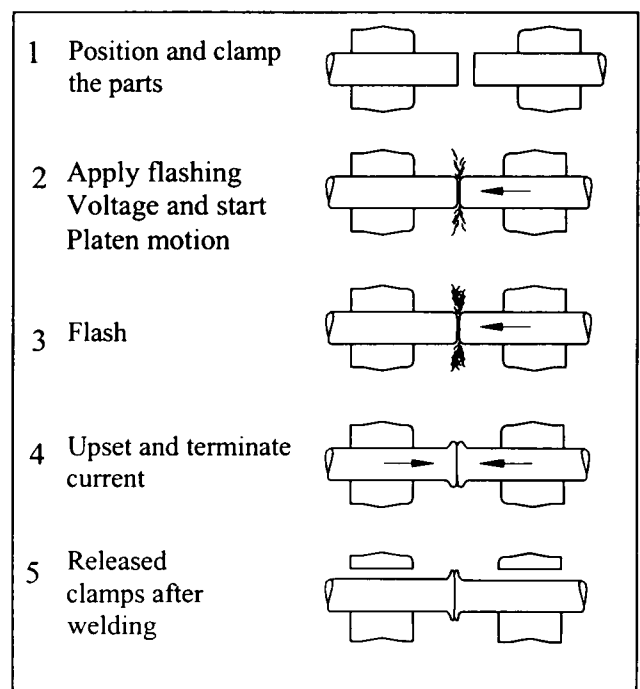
Basic Steps in Flash Butt Welding
